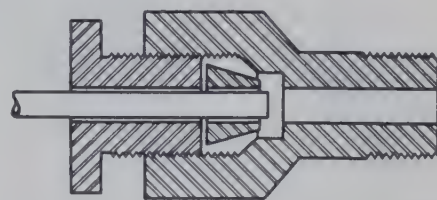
Special steel fittings and valves for high pressure (sectional drawing). The cone may be threaded on the tubing with a left-hand thread so that it will not be turned off the tubing as the threaded gland is turned in its right-hand thread to tighten the joint.
